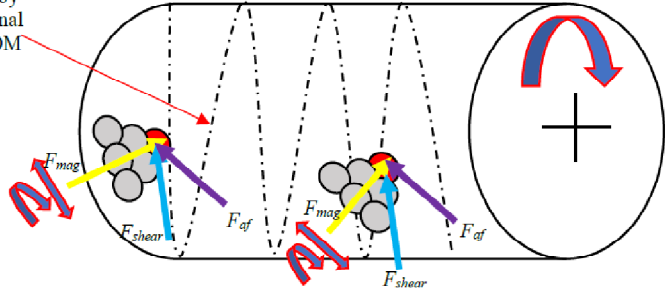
Material removal mechanism along with the forces acting while fine finishing of FDM fabricated external cylindric surface using novel hexagonal tip-based tool
